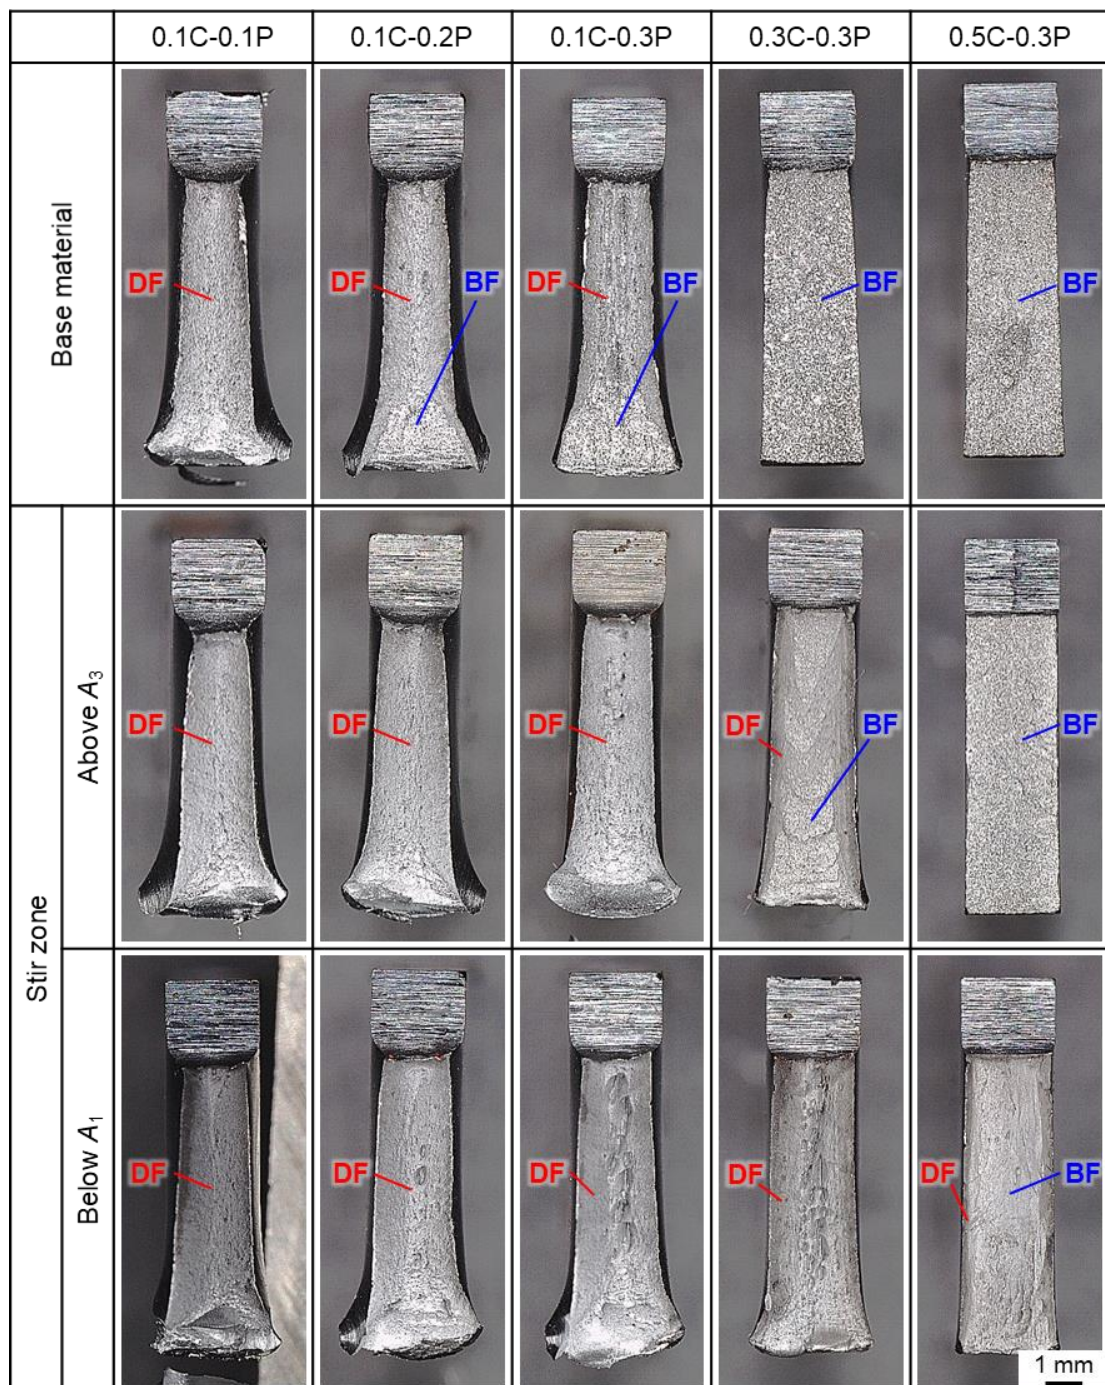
The fracture surfaces of the impact tests at 0 °C of 0.1C-0.1P, 0.1C-0.2P, 0.1C-0.3P, 0.3C-0.3P and 0.5C-0.3P samples. DF: ductile fracture. BF: brittle fracture.
